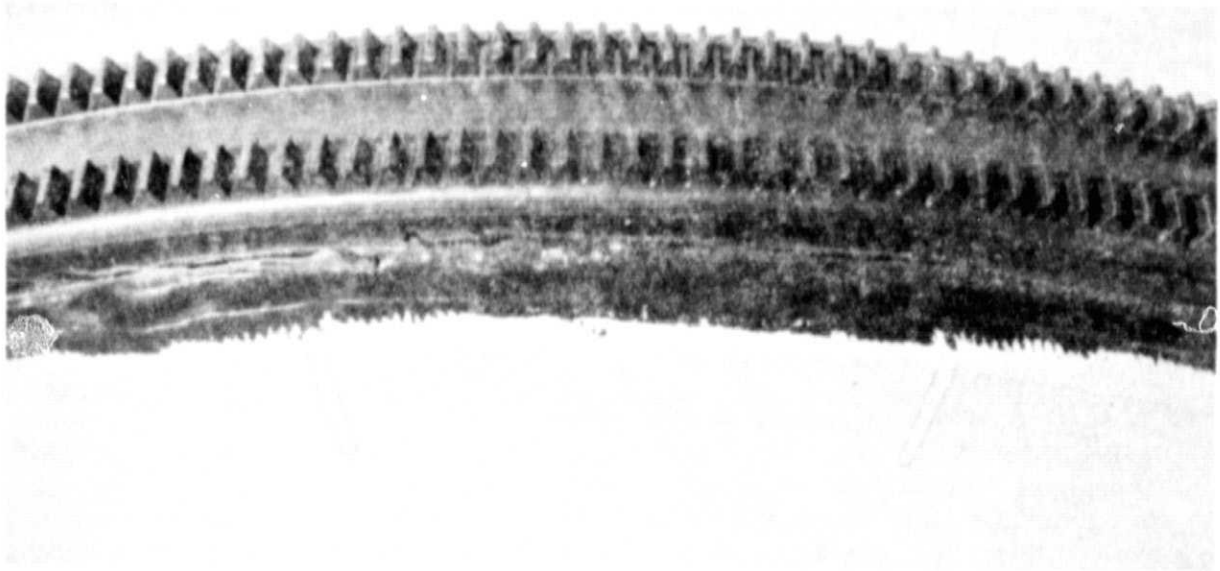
Ford 707 Turbine Engine Core with Elastomerically Bonded Ring Gear
